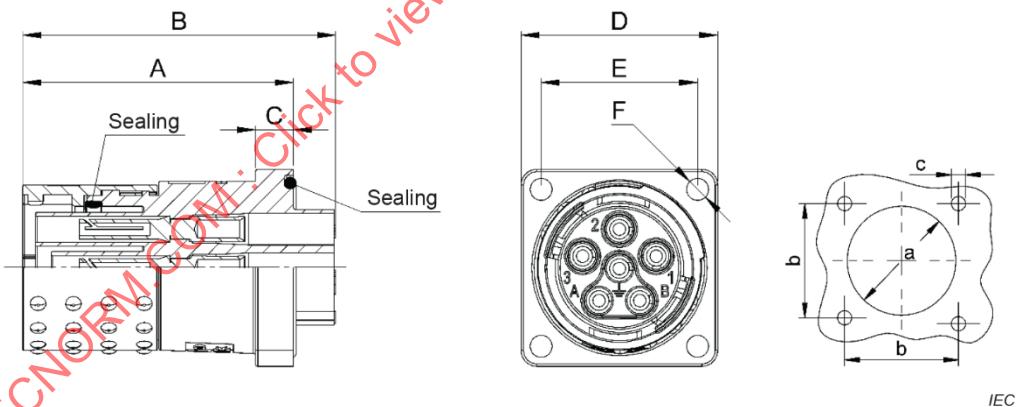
Fixed connector, female contacts, with a square flange front mounting
